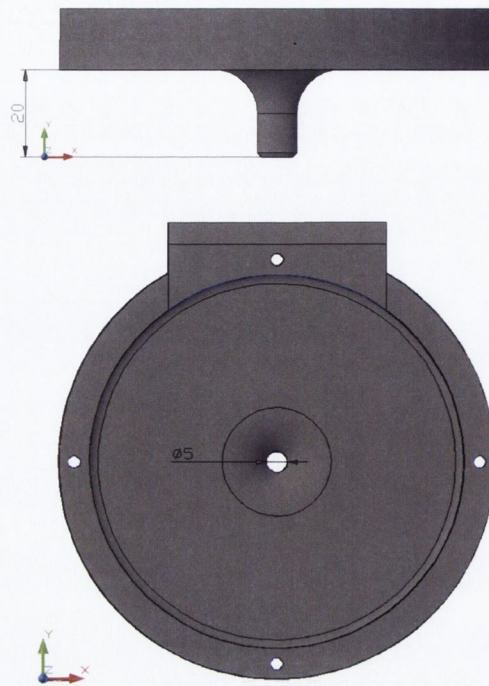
Impinging jet nozzle geometry; elevation view (top) and plan view (bottom)
